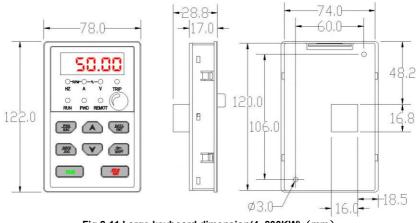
Large keyboard dimension(4~800KW) (mm)
